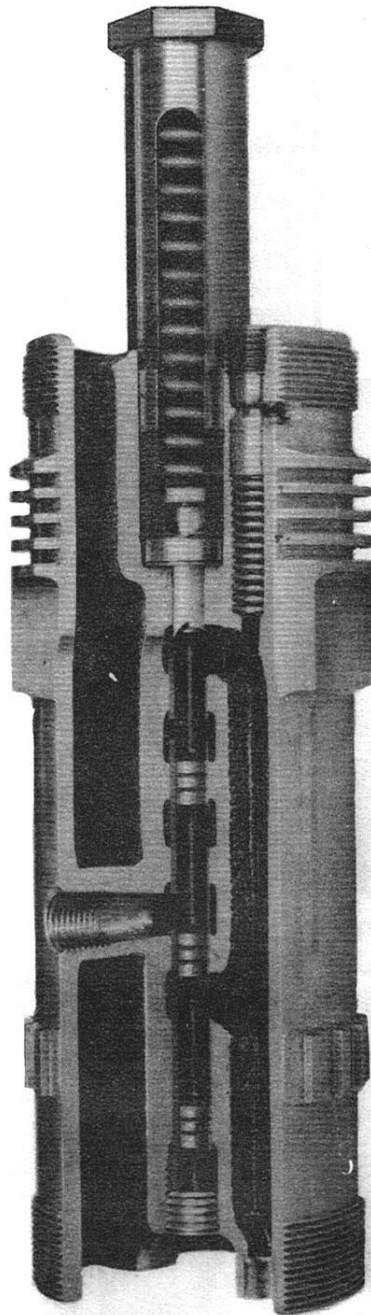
DISTRIBUTOR VALVE POSITION CONSTANT
